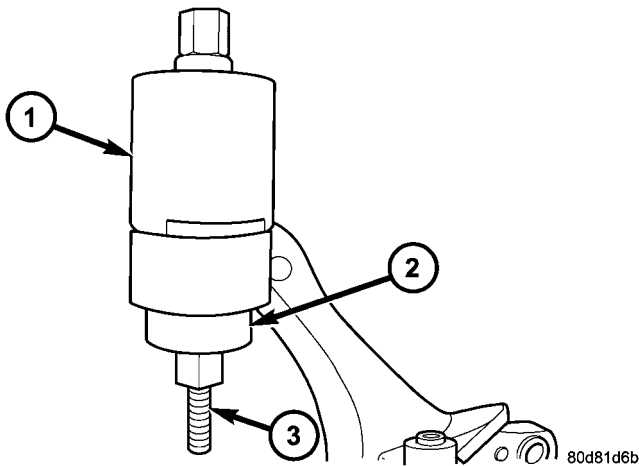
LOWER CONTROL ARM BUSHING - REMOVAL
